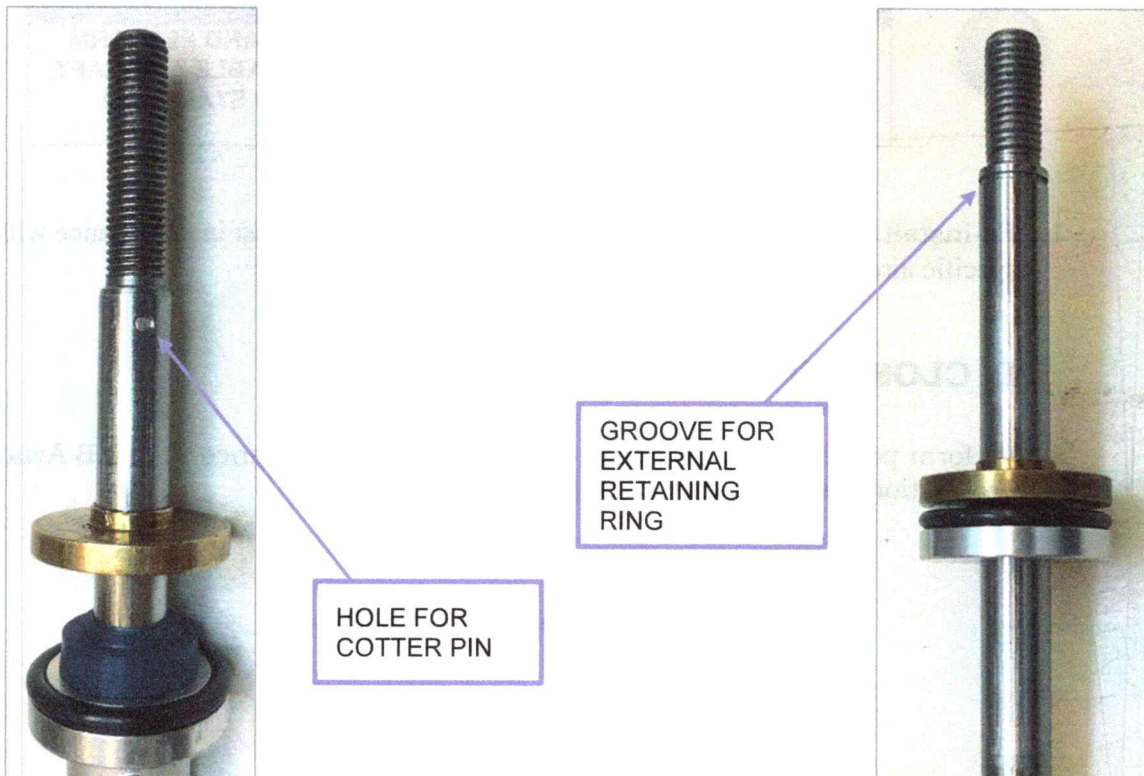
Once LIP SEAL is fully inserted into PISTON ROD GUIDE BUSHING, remove all tooling.
